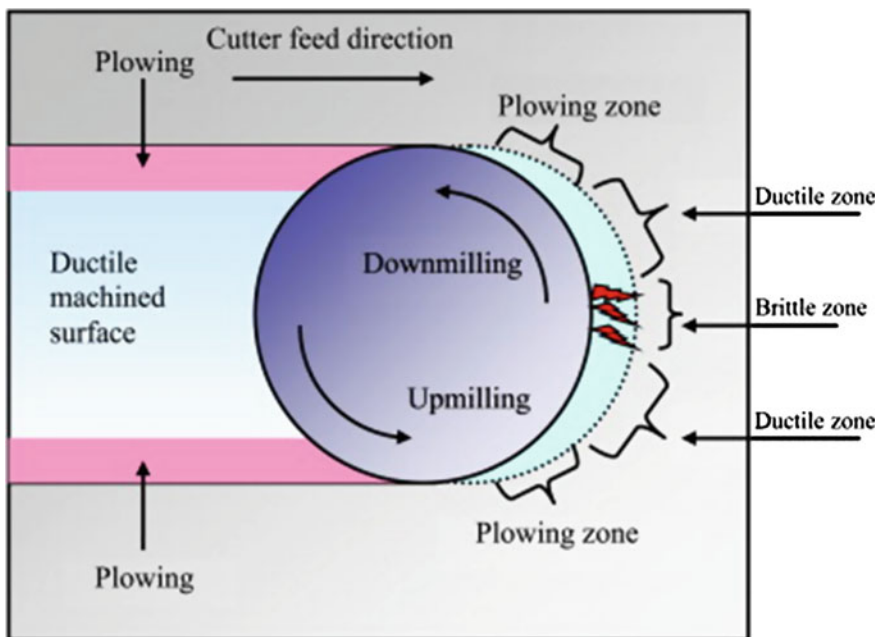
Different regimes machining in slot machining of glass [6] with kind permission from Elsevier
